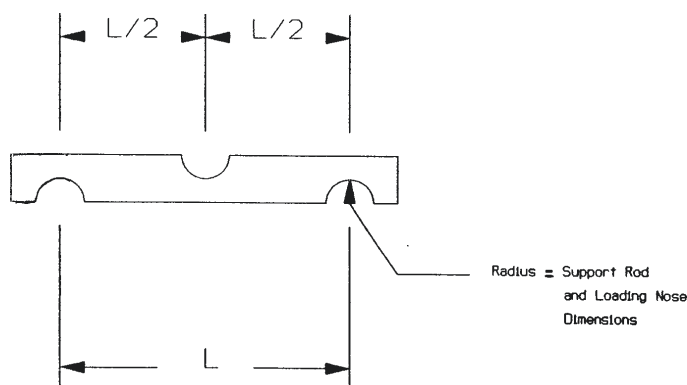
Fixture Used to Set Loading Nose and Support Spacing and Alignment
